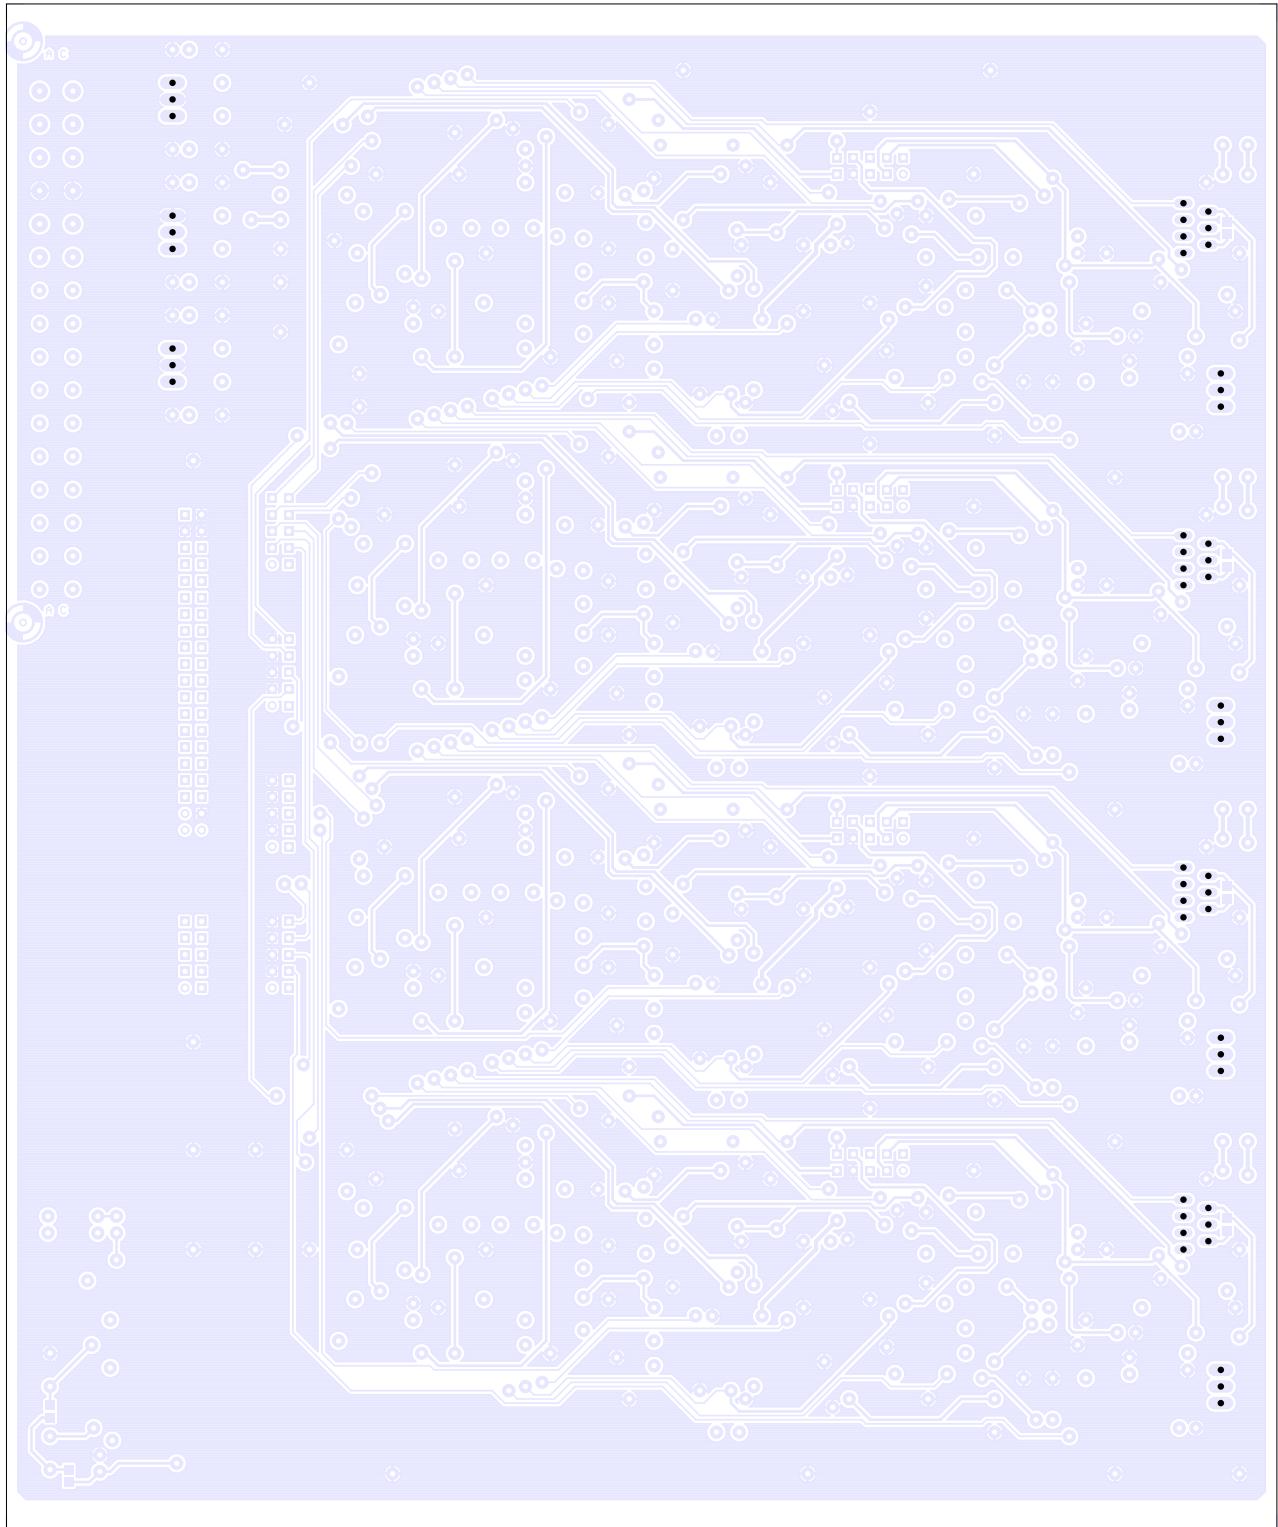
Board bottom view showing drills with 1.0 mm (0.039 in) diameter
